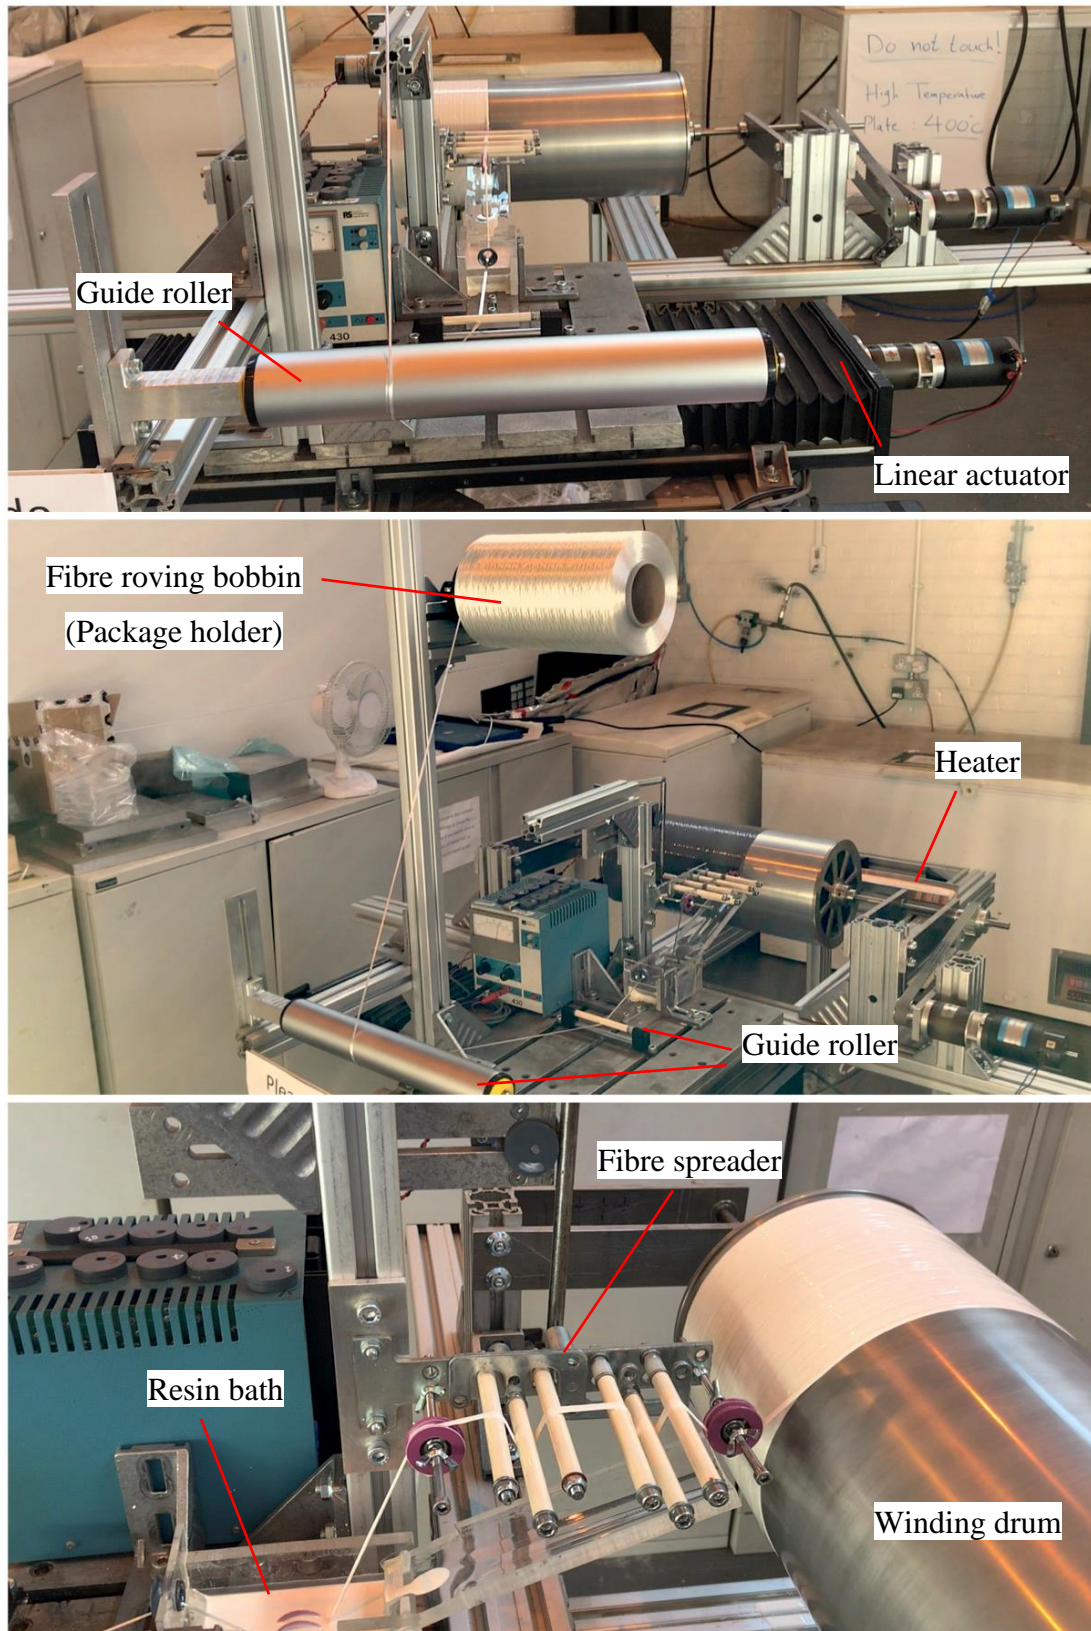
Assembled drum winding thermoplastic prepreg rig comprising several parts.
